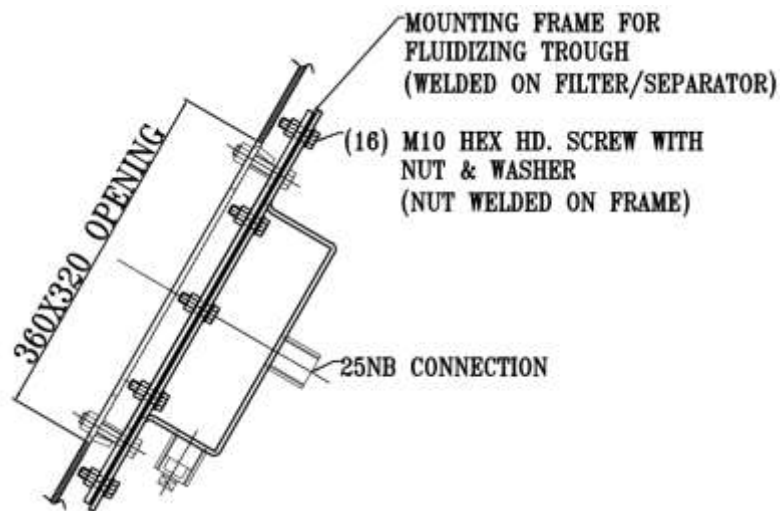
Design drawing of the trough type fluidizer used in vacuum test rig
